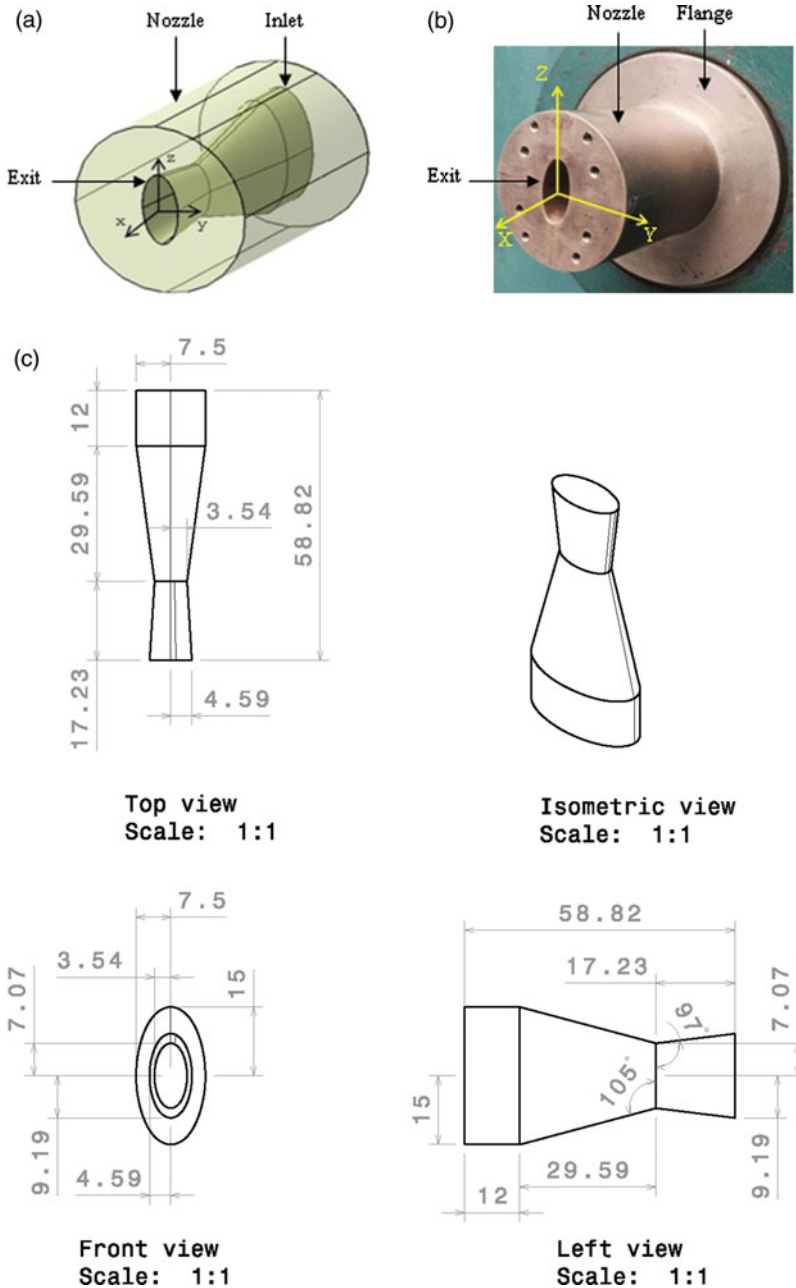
(Colour online) Nozzle details: (a) CAD model of the nozzle, (b) fabricated nozzle model and (c) nozzle dimensions (in mm).
